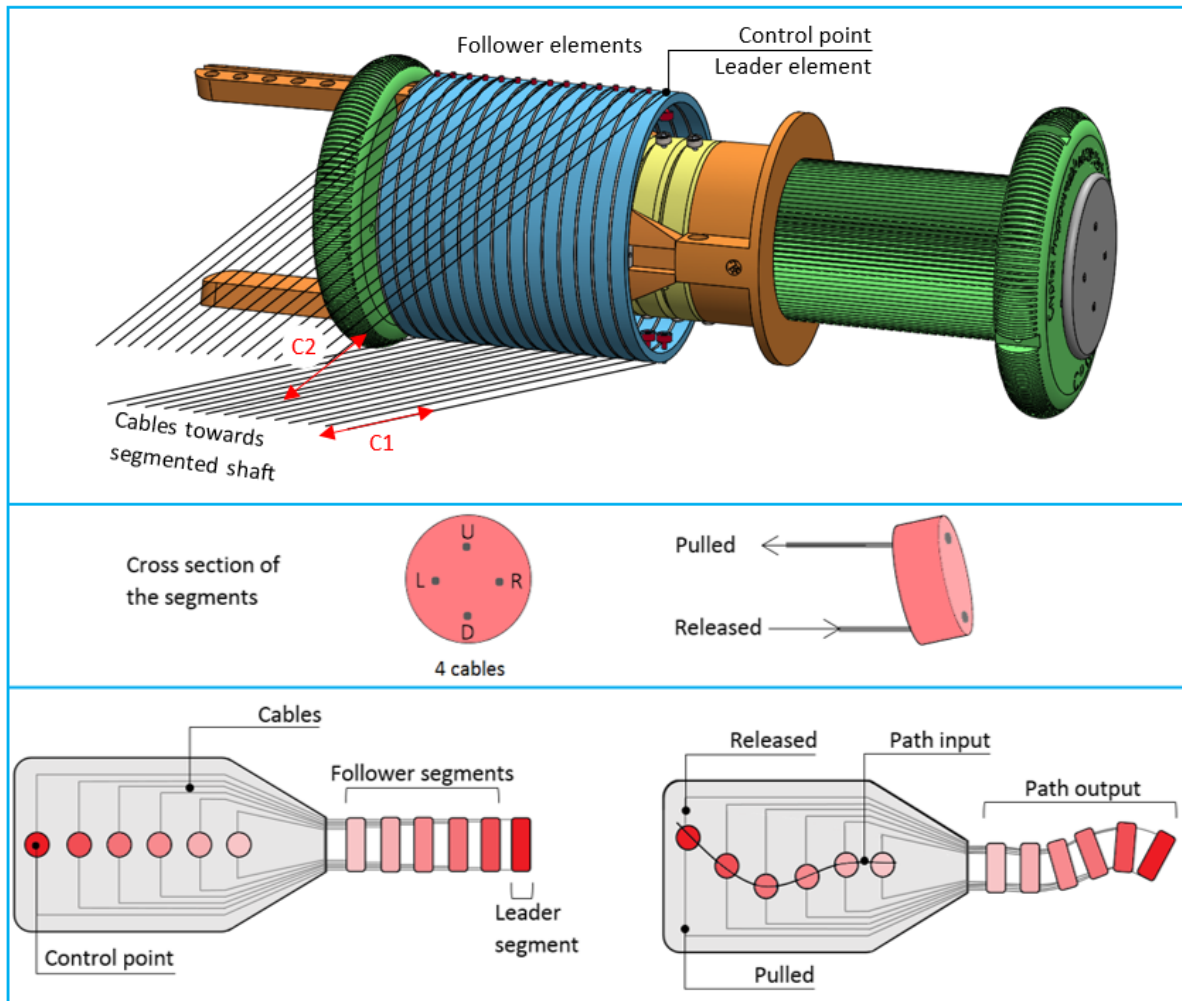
Working principle of the reading rings and antagonist cables. Figure A shows how the cables are attached to the reading rings. The guiding mechanism is not included in this drawing. Each reading ring steers two antagonist cables. Figure B shows how the cables provide the movement of the shaft segments. The upper (U) and lower (D) cable provide the motion in the vertical direction and the left (L) and right (R) cable provide the rotation of that segment in the horizontal direction. By pulling one cable and releasing its antagonist cable, the segment rotates in the pulling direction. Figure C is a schematic drawing how the displacement of a control point provides the pulling and release of cables. In the actual prototype, as shown in Figure A, the antagonist cables each have their own control point. The control points are connected to the reading rings. So, a rotation of the reading ring provides an equal displacement of both control points. One control point moves away (pulling the cable), while the other control point moves forward (releasing the cable).
